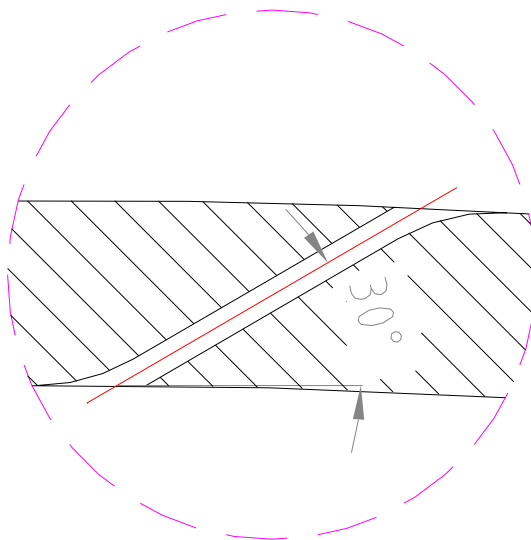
Lead hole of heater in the coil bobbin
